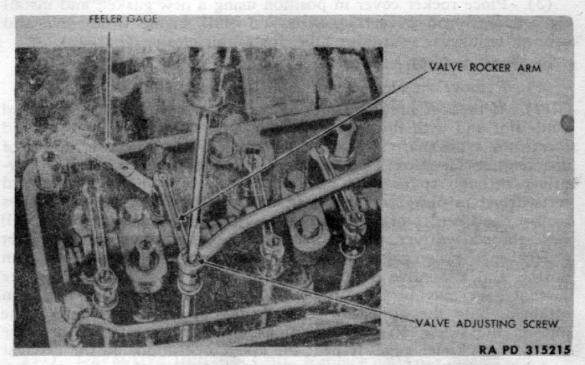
Gaging Valve Clearance Adjustment, Using Gage (41-G-400)
